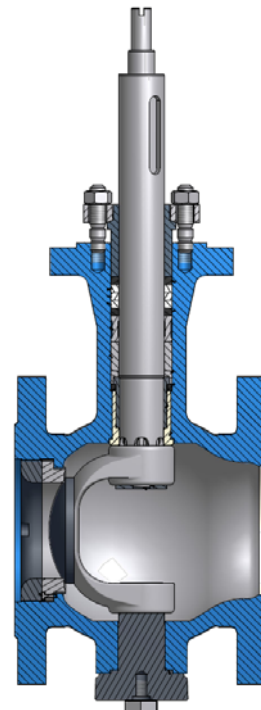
VETEC Rotary Plug Valve Assembly Drawing
